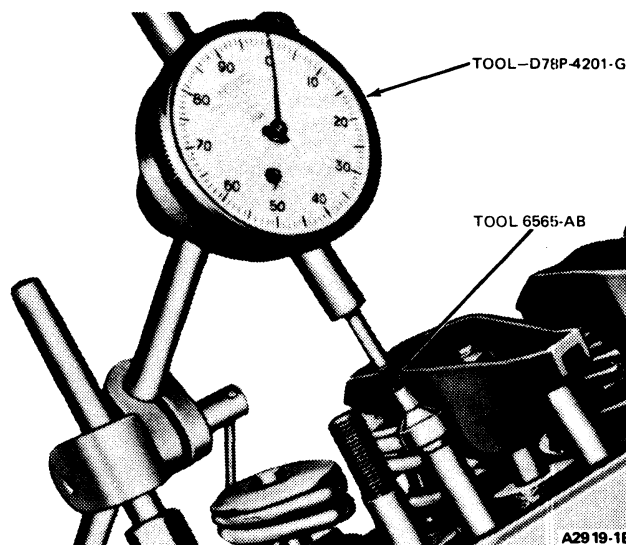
Typical Camshaft Lobe Lift—4.9L (300 CID) I-6 Engines
